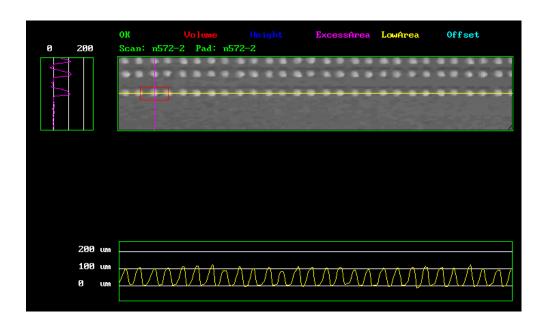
3D Solder Paste Inspection Using the MVT SP-1 after Calibration.
